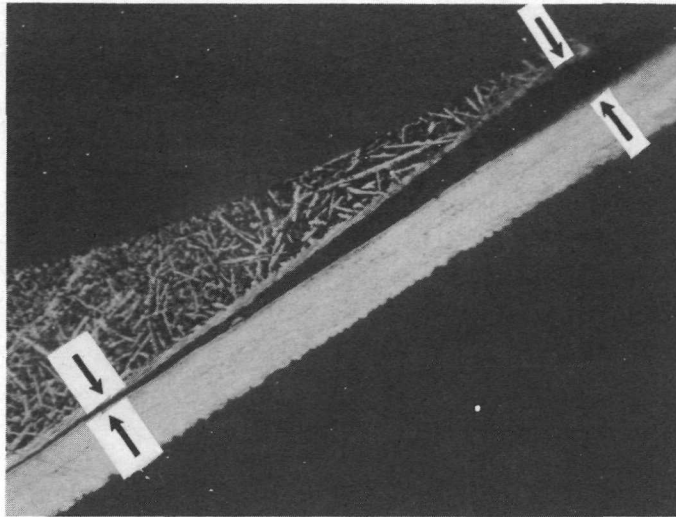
Cross section of connection shown in Figure 20, revealing the solder-circuitry separation. (130X magnification)
